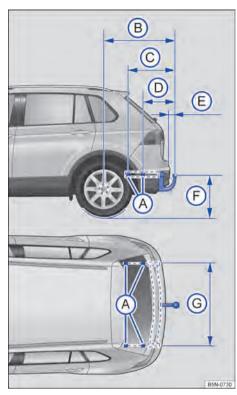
Dimensions and mounting points for retrofitting a towing bracket.
